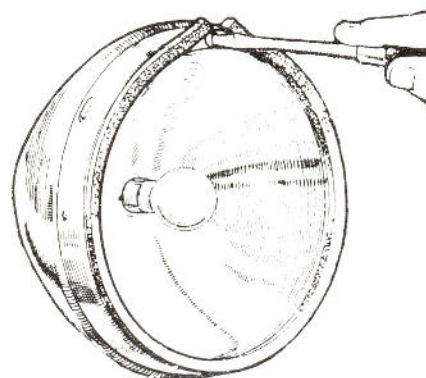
Showing location of headlamp rim (8 h.p. model).
